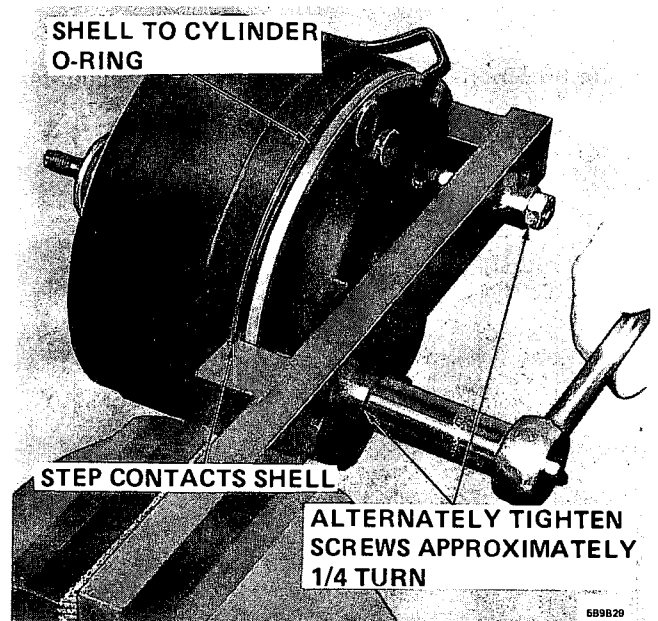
B-54 - Removing Compressor Shell - 4 Cylinder Compressor
